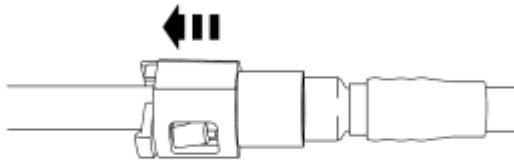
Disconnecting Quick Connect Coupling From Tube Using Special Tool (310-040)
